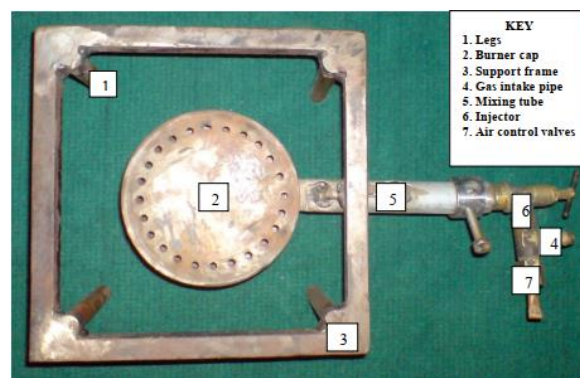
Plan view of constructed Biogas Stove (Awulu et al., 2020)
